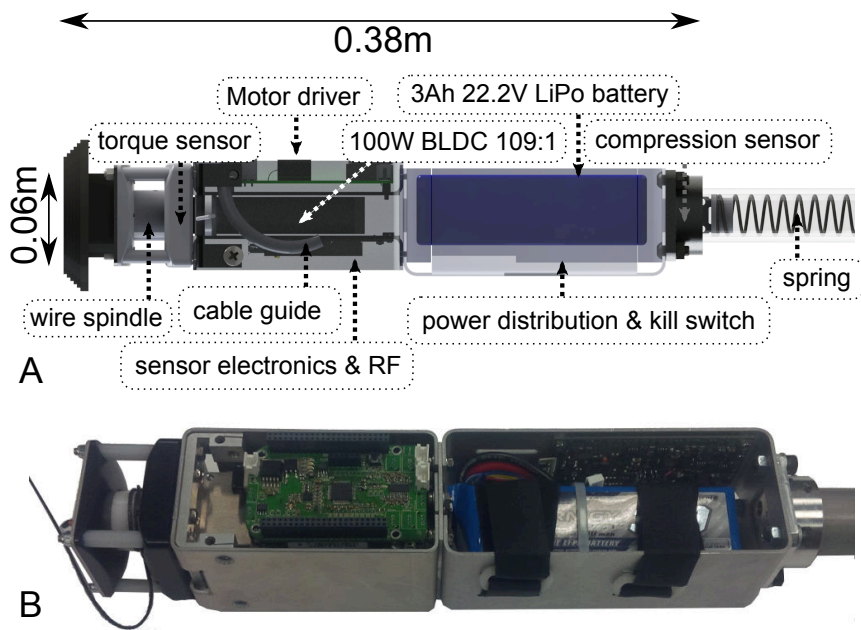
SUPERball end cap design. Each end cap is fully independent. A) CAD design B) Hardware prototype with wiring and protective cap removed. The spring assembly (on the right) slides into an aluminum (2024) tube connecting two end caps. A single bolt is sufficient to secure the end cap on the tube. The main structural components are made out of sheet metal (2 mm 6061-T6 aluminum). Some load bearing parts such as the cable guide bracket use 7075-T7 (the top part of the cable guide bracket is clearly visible in B). Note that the actual cables are not shown, except for the actuated wire in the hardware prototype. In the current design, two cables run through the cable guide and along the battery and finally into the spring assembly inside the tube. Each has two main wireless interfaces: One provides high bandwidth with variable latency, the other is a low latency network for inter strut communication. A CAN bus provides a robust 1 Mbit/s communication line between the various circuit boards. To ensure safe operation each end cap has a wireless and physical kill switch.
